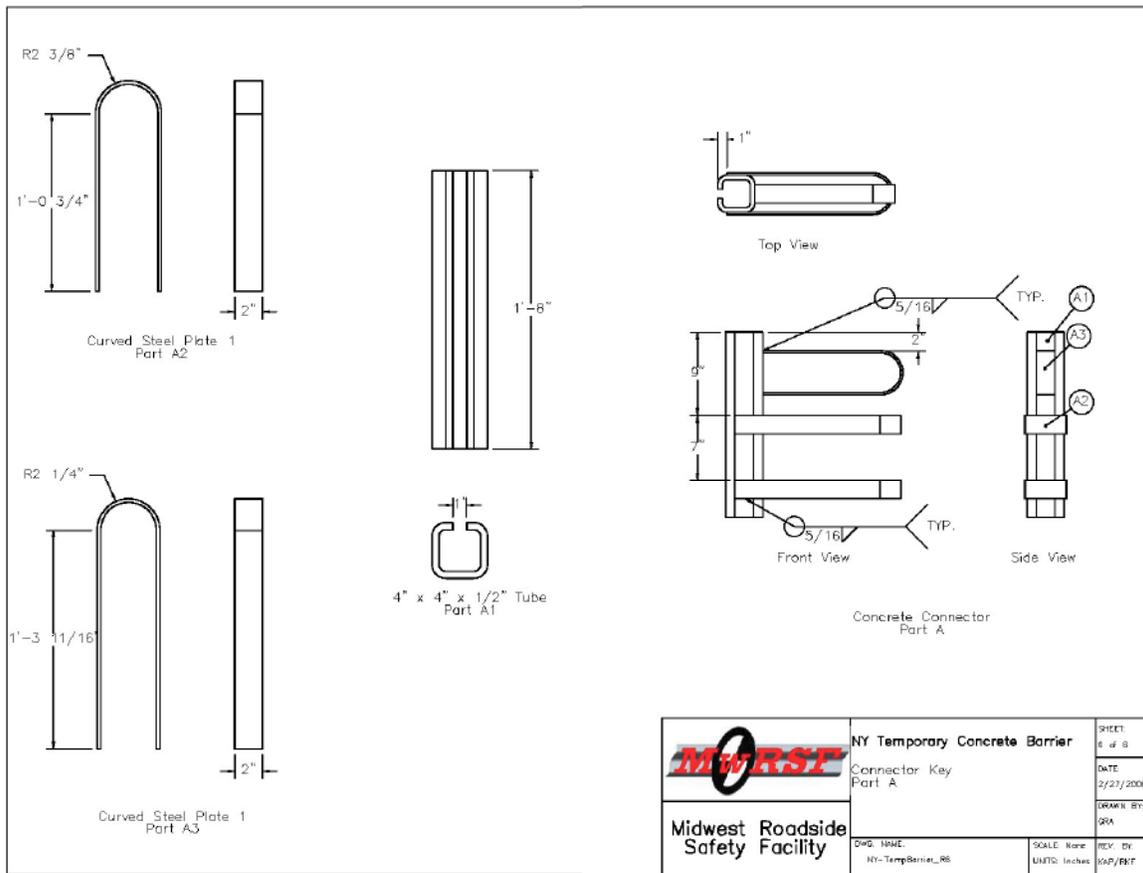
Temporary Concrete Barrier Connector Assembly Details (English), Test NYTCB-2
